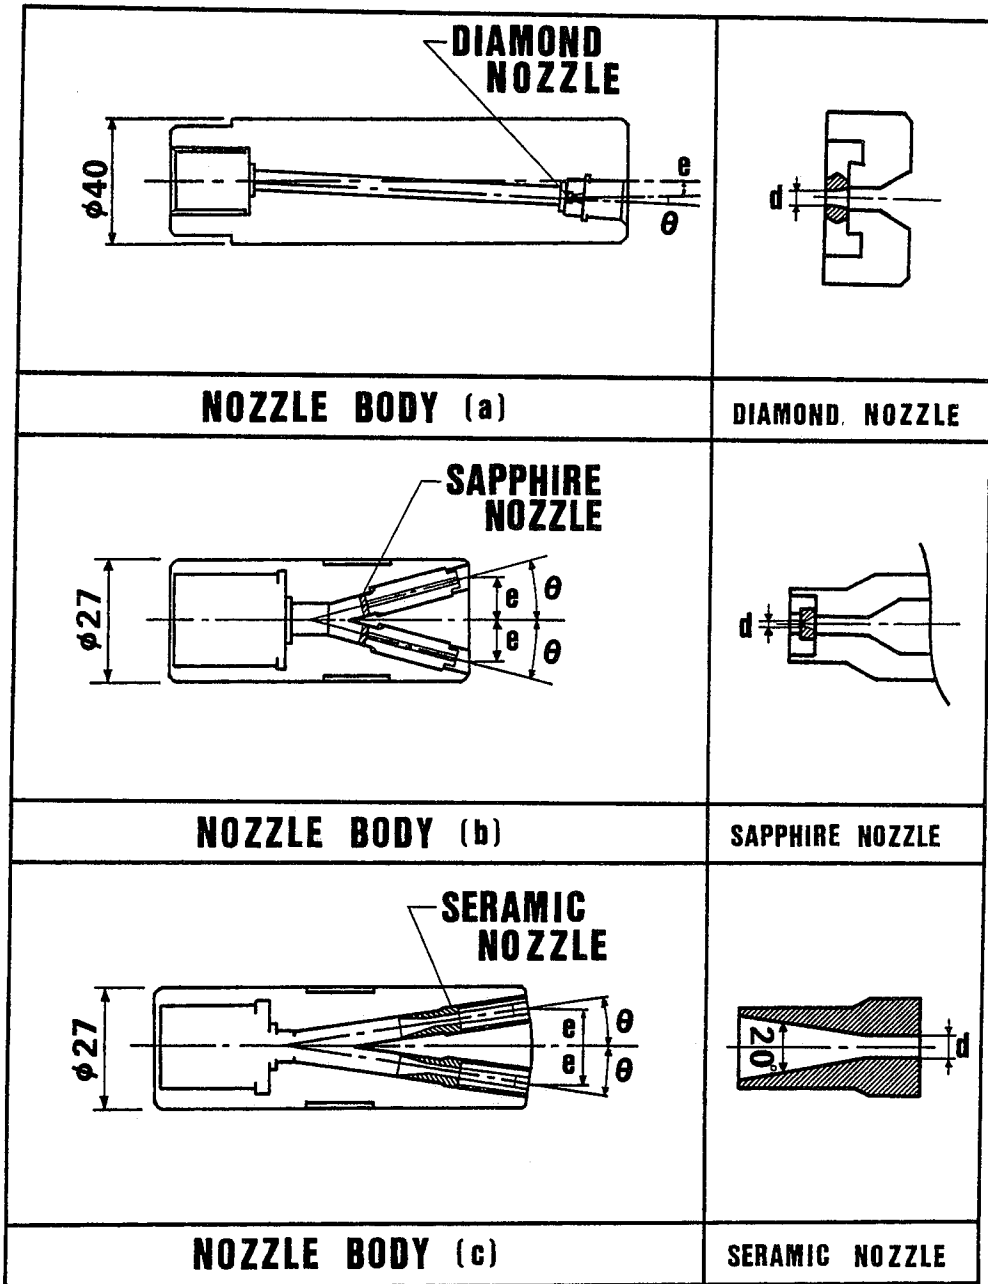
Rotary Jet Nozzles and Nozzle Bodies
